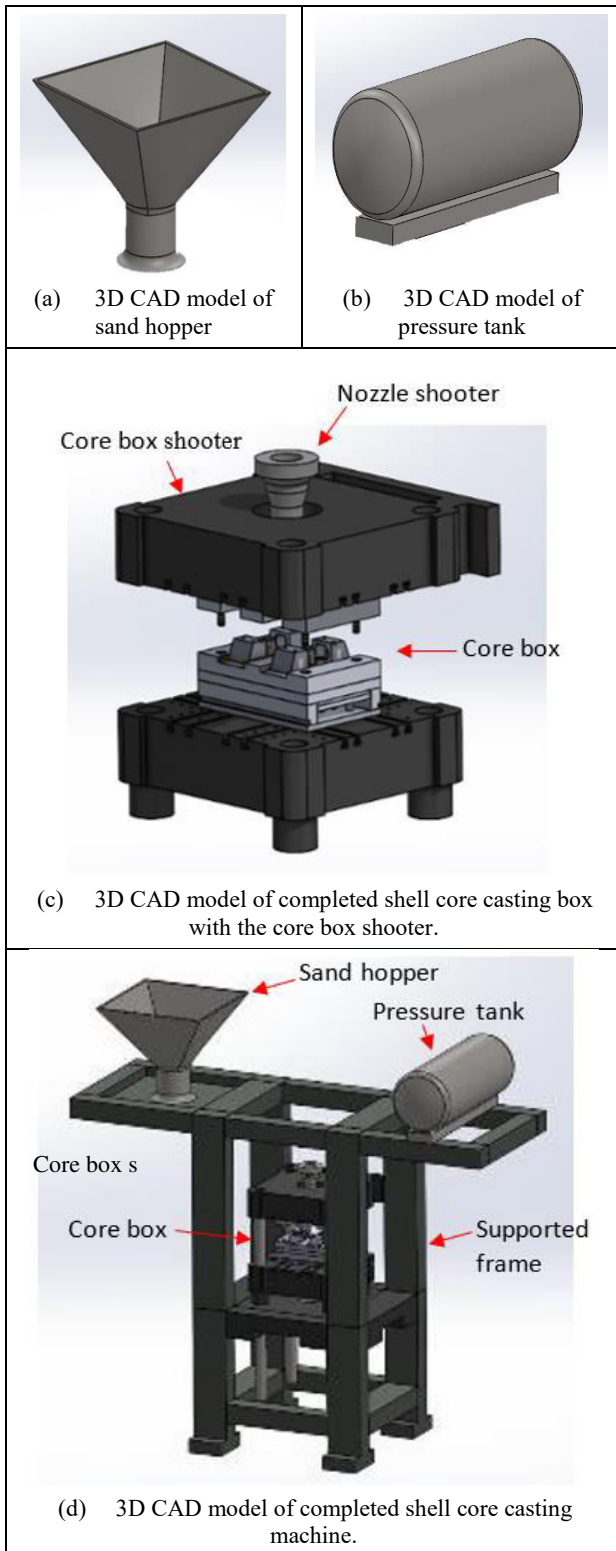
3D CAD model of the sand hopper and pressure tank, (a) 3D CAD sand hopper, (b) 3D CAD pressure tank, (c) 3D CAD shell core casting box complete model, dan (d) 3D CAD complete view.
